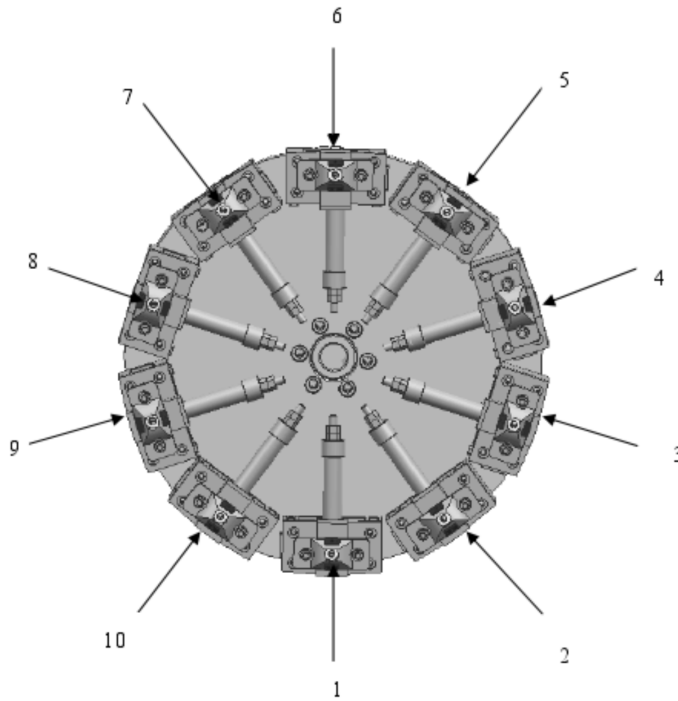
1–No.1 position; 2–No.2 position; 3–No.3 position; 4–No.4 position; 5–No.5 position; 6–No.6 position; 7–No.7 position; 8–No.8 position; 9–No.9 position; 10–No.10 position
